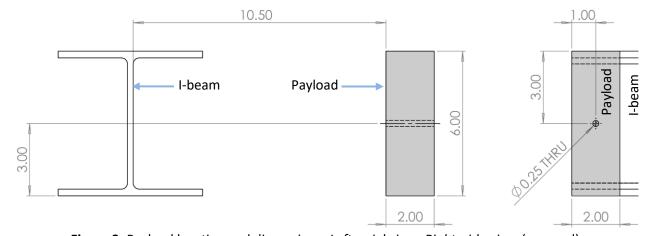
Payload location and dimensions. Left: axial view. Right: side view (cropped).
